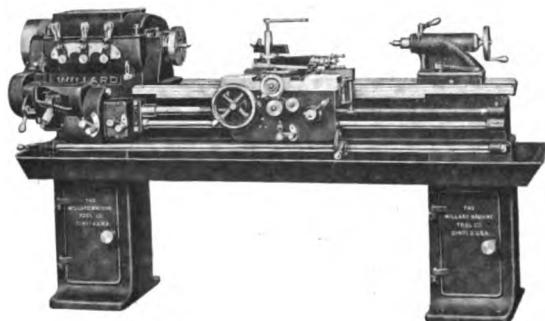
13-Inch High Power All-Geared Head, Quick Change Tool Room Lathe
